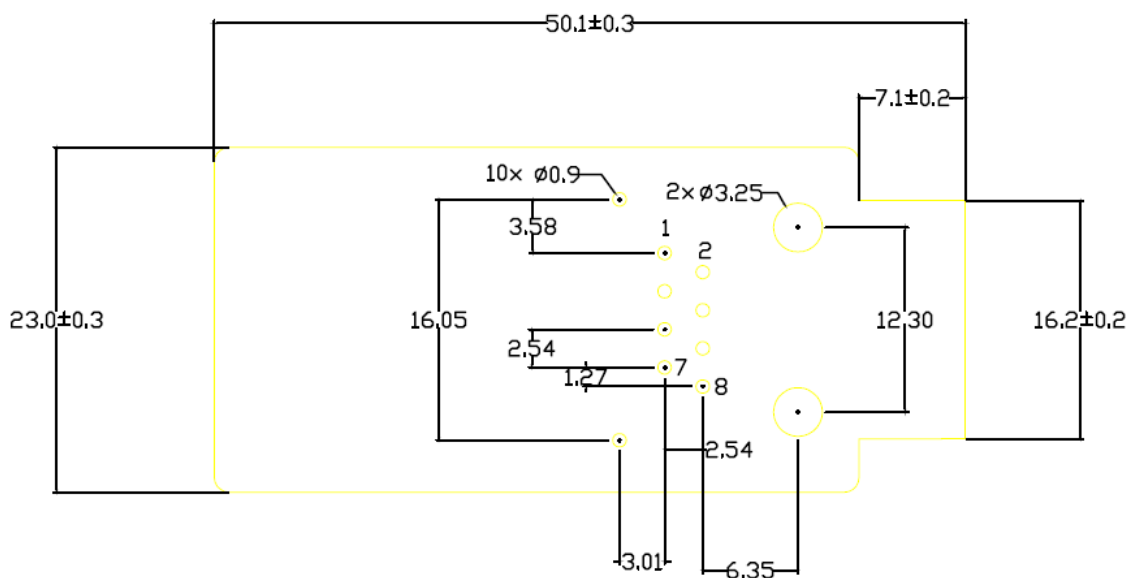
Eport Pro-EP20-PIN recommended PCB layout
